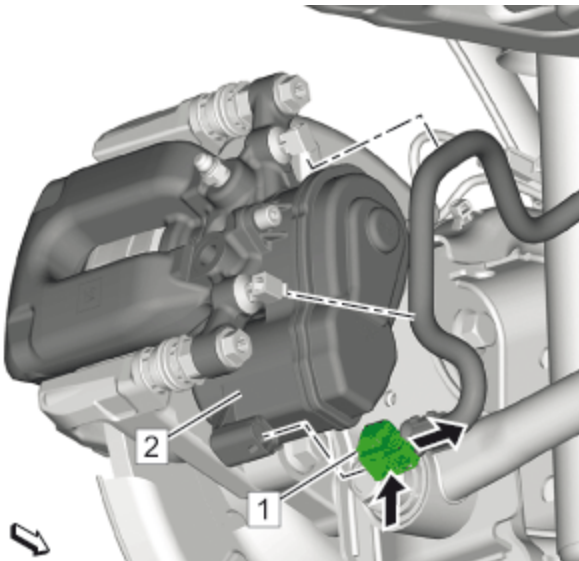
Brake Caliper Assembly And Lectrical Connector
